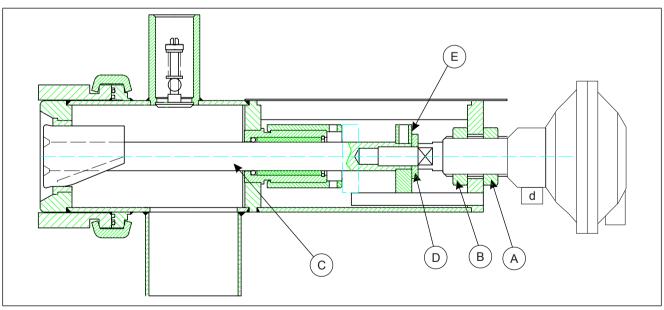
Valmet SD502 sampler body: A & B - fastening nuts, C - piston shaft, D - support ring, E - piston rotation guard.
